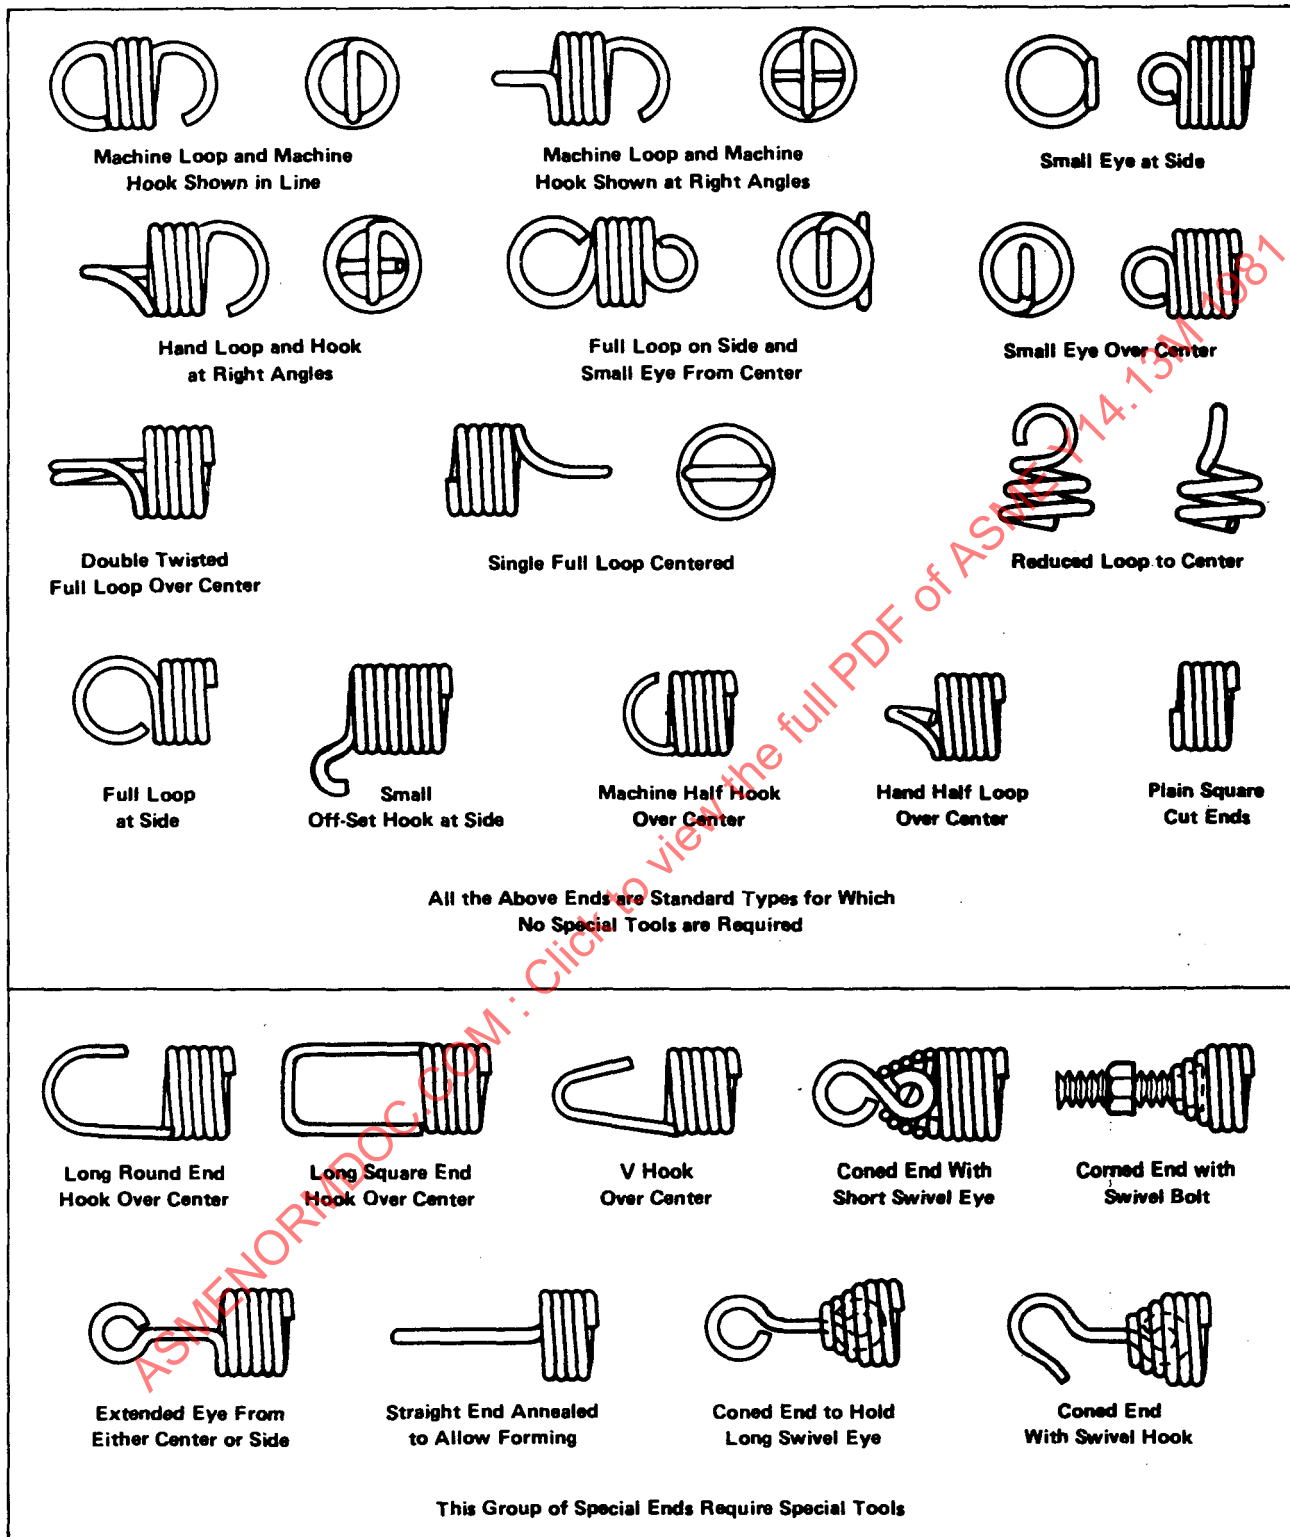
TYPES OF HELICAL EXTENSION SPRING ENDS
